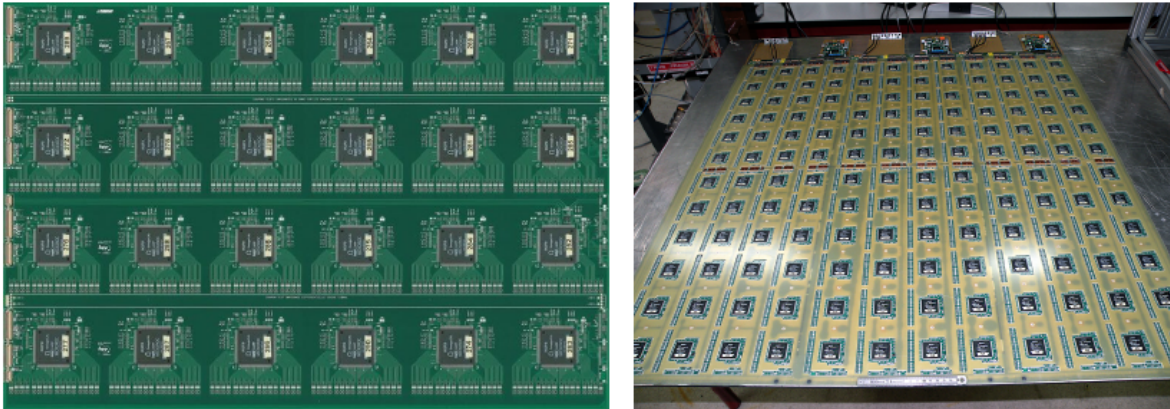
Photographs of an Active Sensor Unit and the 1 m^2 prototype during assembly.
